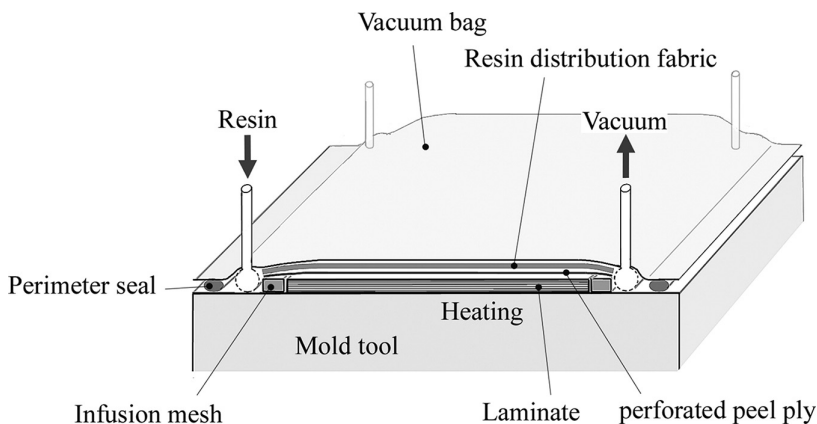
Vacuum-Assisted Resin Transfer Molding (VARTM).
